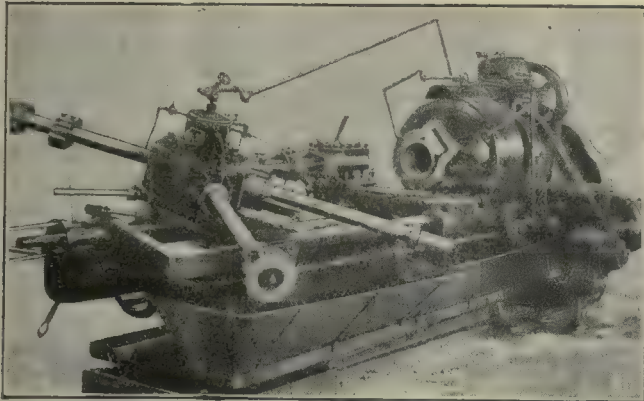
TURRET LATHE FOR OPERATIONS ON FRONT CLIP. FIG. 63. MILLING SIDE OF EXTRACTOR
